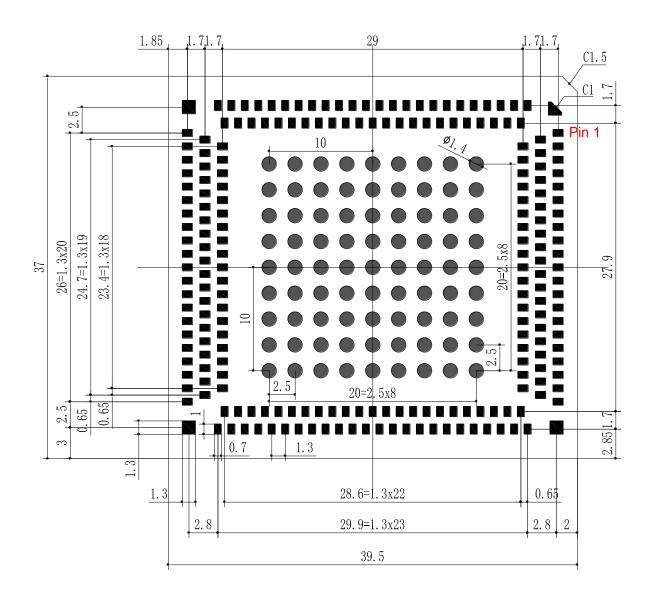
Module Bottom Dimensions (Bottom View, Unit: mm)
